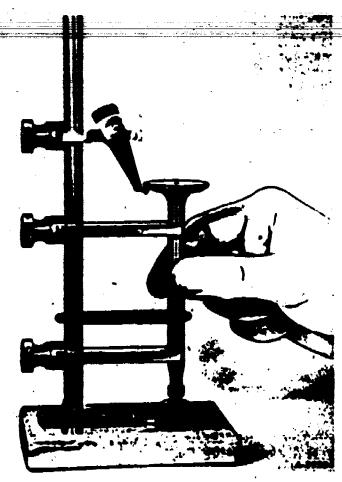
Checking Valve Stem Straightness and Face Run-Out With SE-1800 Valve Gauge.
